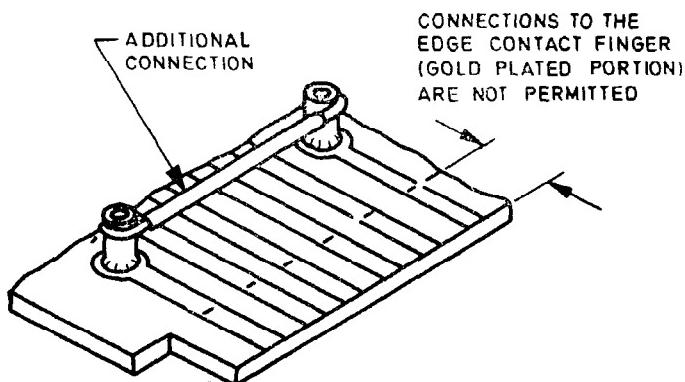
MODIFICATION TO PRINTED EDGE CONNECTORS
